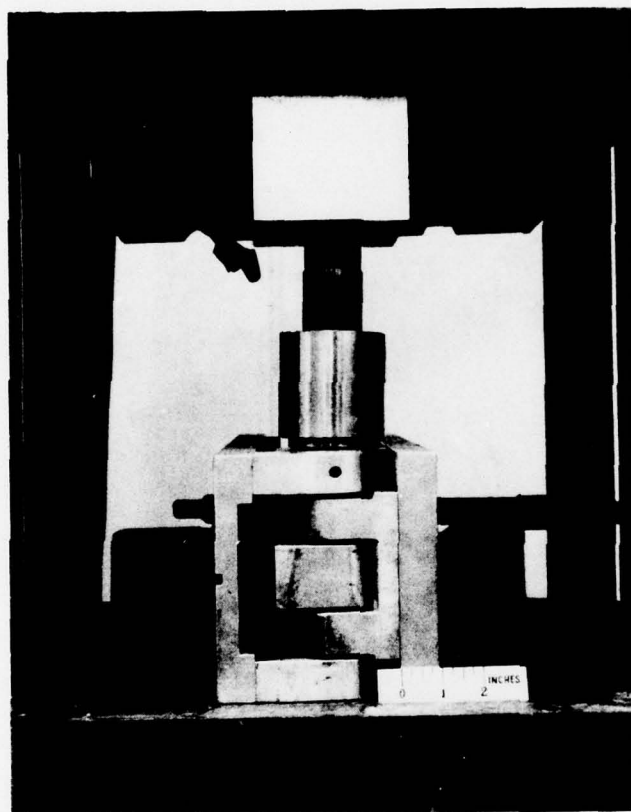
Photograph showing material container positioned ready for injection into mold for formation of turbine blade shape.
